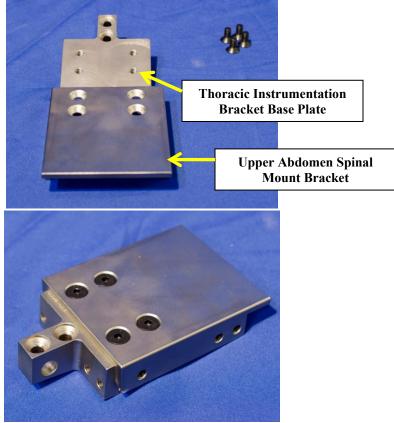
Assemble spinal mount bracket to thoracic instrumentation bracket base plate
